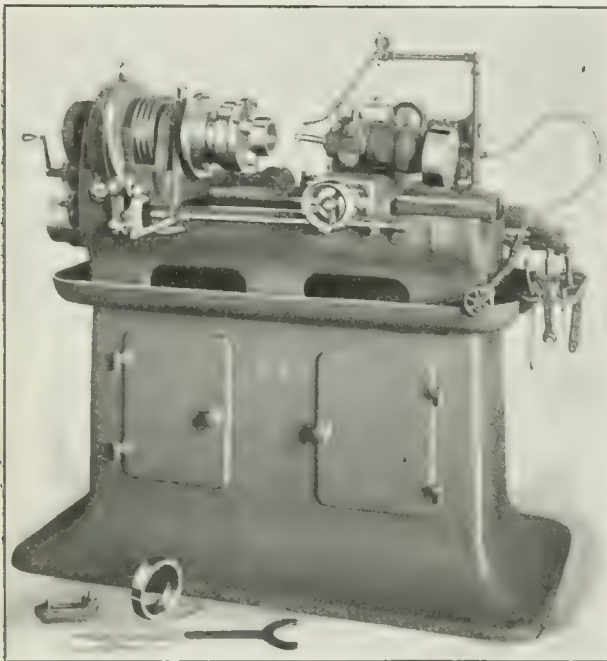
A Thread Miller Equipped with the Internal Thread Milling Attachment Developed by the Pratt & Whitney Company, Hartford, Conn.
